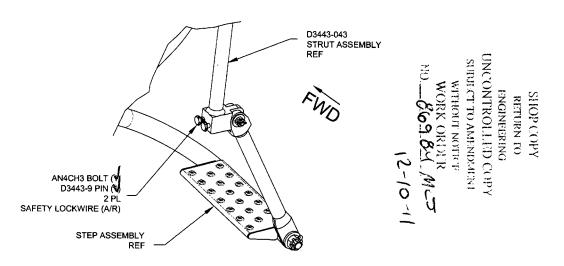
Detail Safety Wiring, D412-630-032 RH,Pilot/Co-Pilot Folding-Step Installation (Shown) D412-630-031 LH (Opposite)
